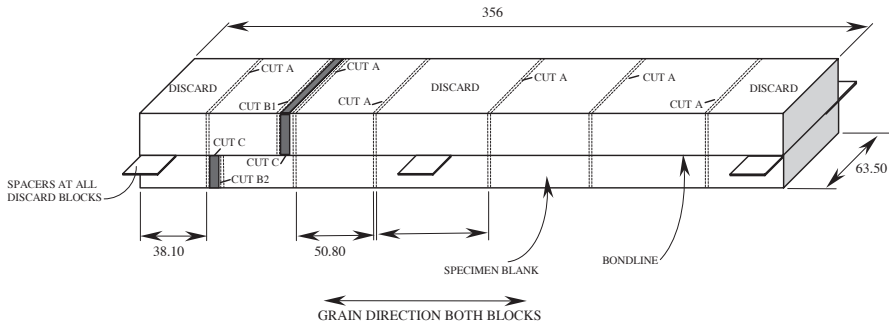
Bonded assembly showing method of cutting four test specimen blanks
